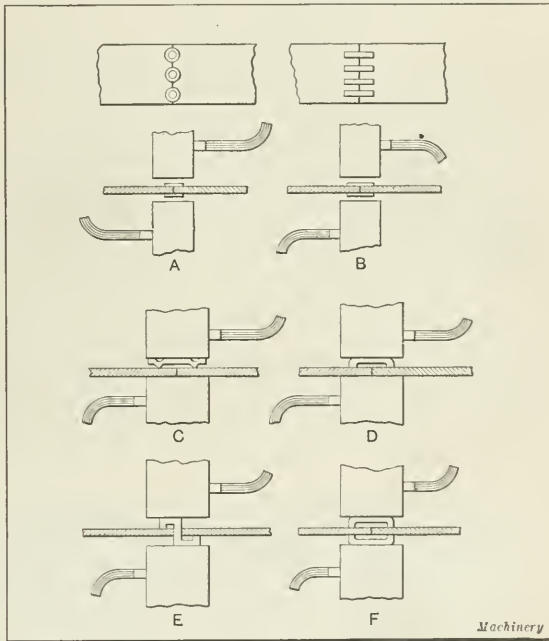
Diagram illustrating Principle employed in accomplishing Process known as "Bridge- or Tie-welding," permitting the joining of Narrow Strips without decreasing Length
